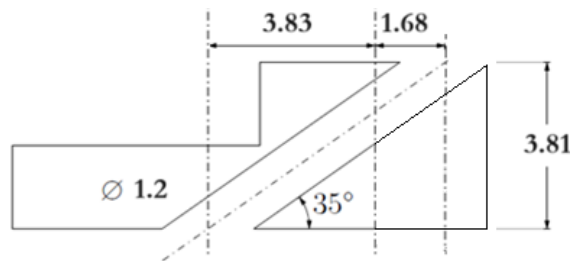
Cylindrical Hole Geometry (dimensions in cm)
